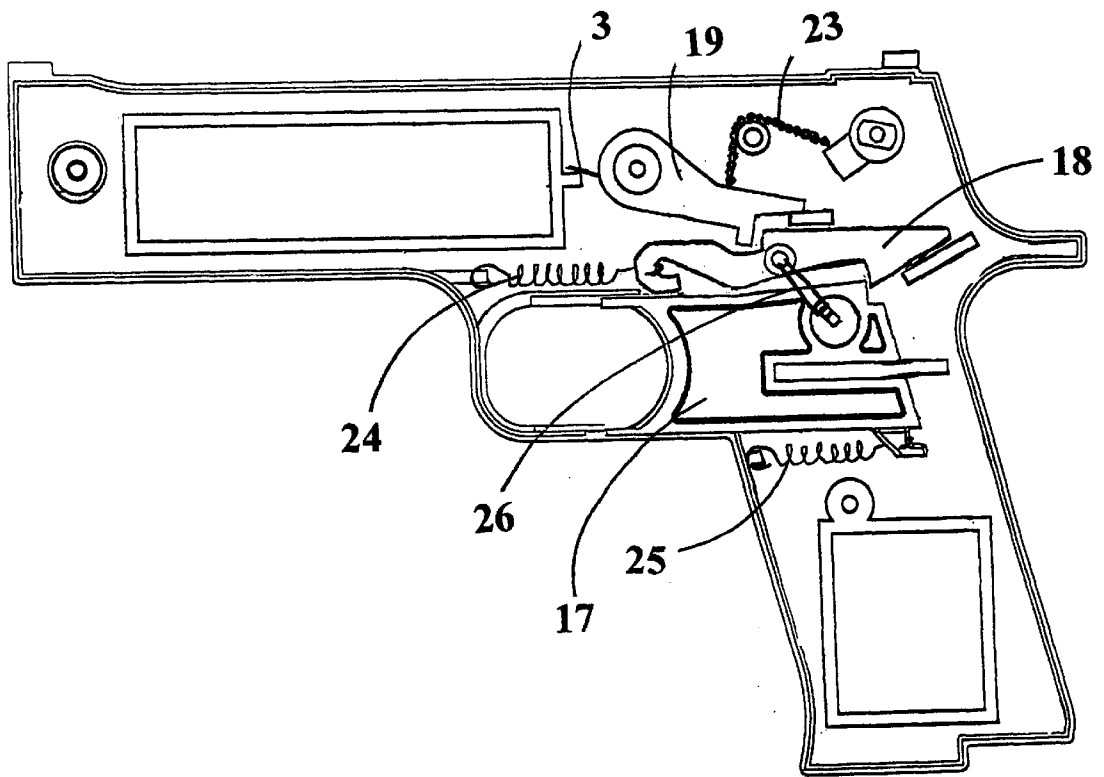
COMPLETE ASSEMBLY IN SINGLE-ACTION POSITION
